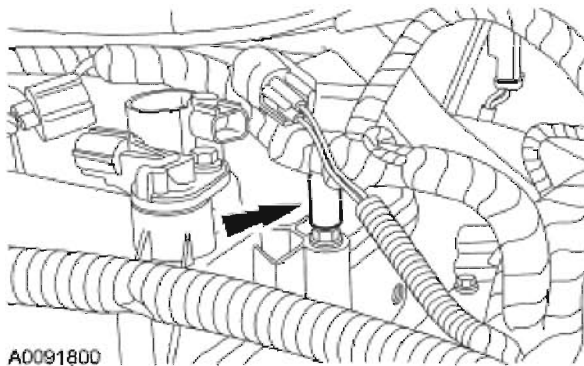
Locating Coolant Hoses (3 Of 3)
